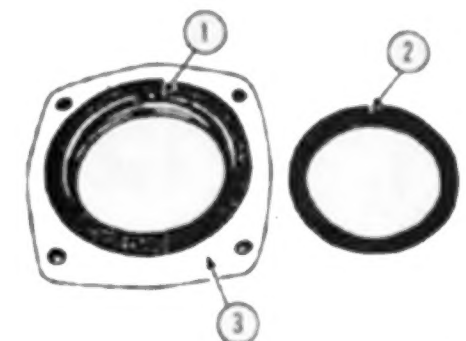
View showing 2-piece outer seal (1 and 2) and retainer (3).
